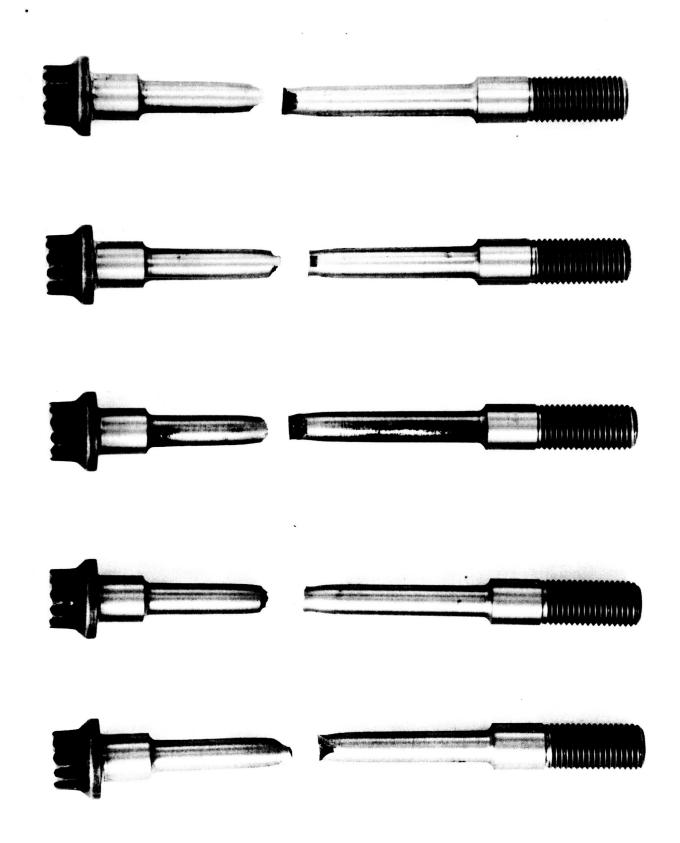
A A-286 REDUCED SHANK BOLT SPECIMENS
